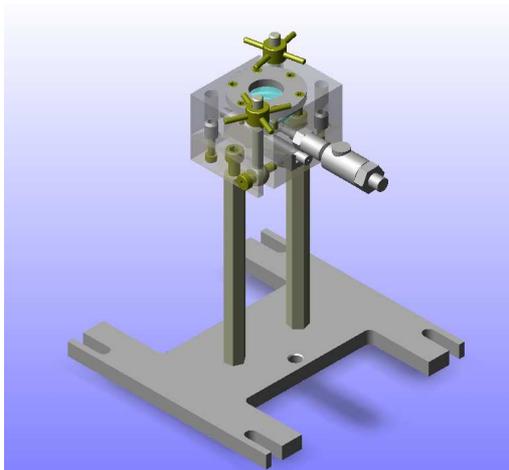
Laser welding under helium gas environment for hermetic sealing of end cap to the cladding
